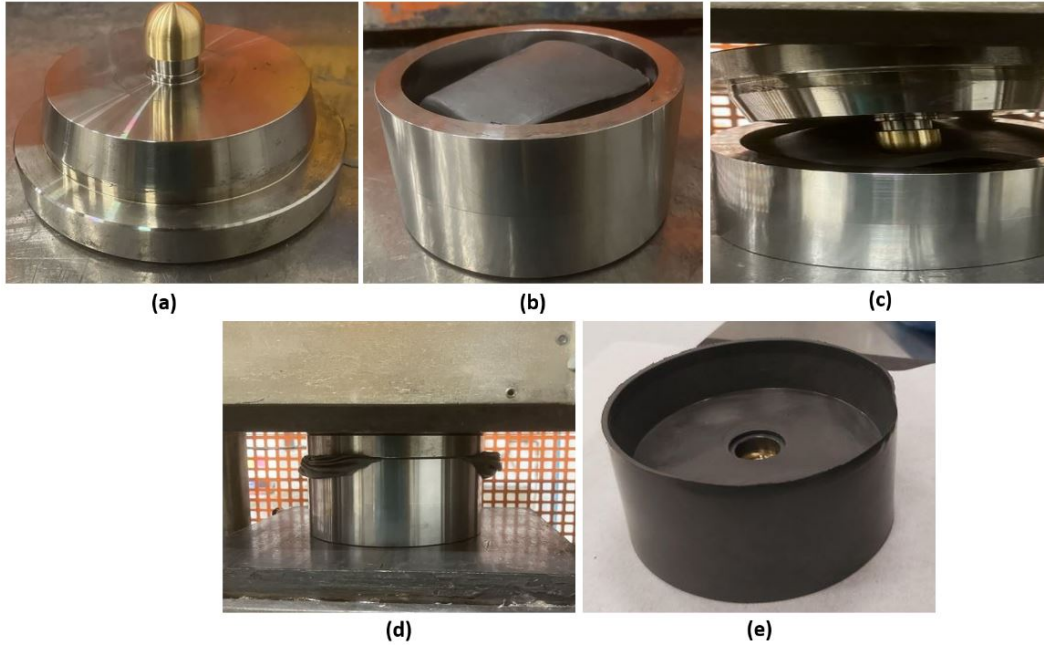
(a) HV Electrode connect with top (b) Filled sample in the mould (c) Moulding placed in the press machine (d) Moulding in the press machine (e) Final output of moulded electrode sample
